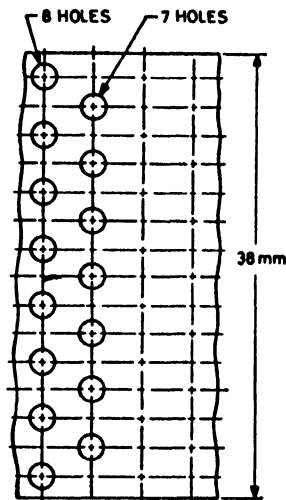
STAGGERING OF 7/8 HOLES IN A FILLET
